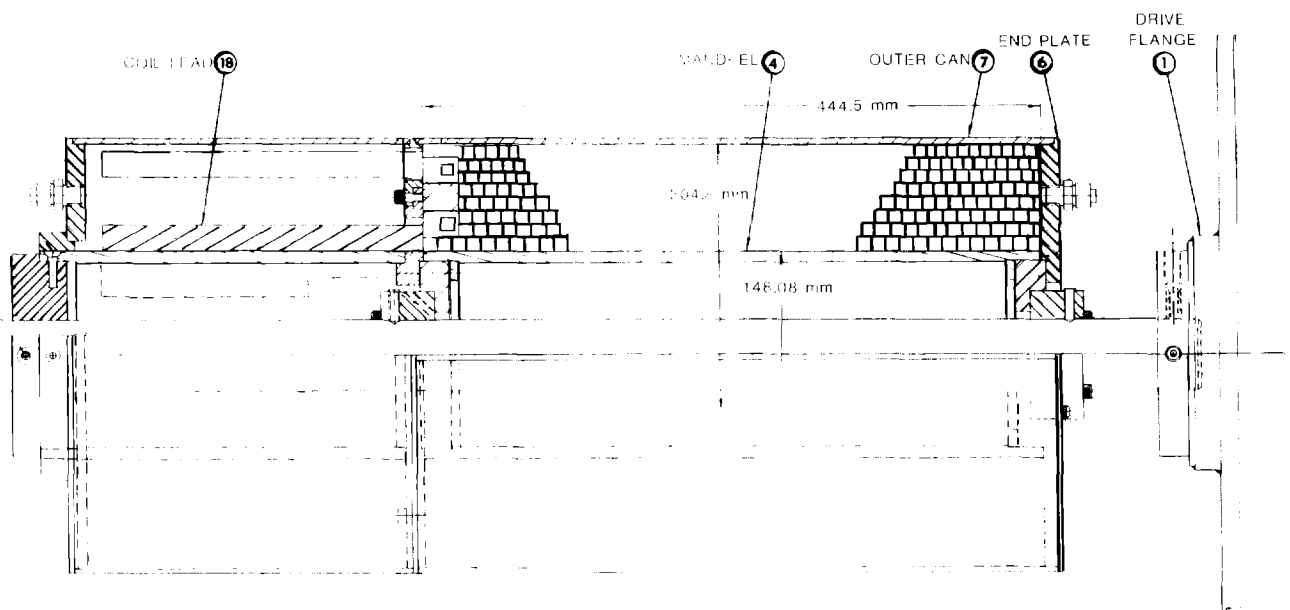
Cross-sectional view of coil winding as it is mounted on the coil winder.
